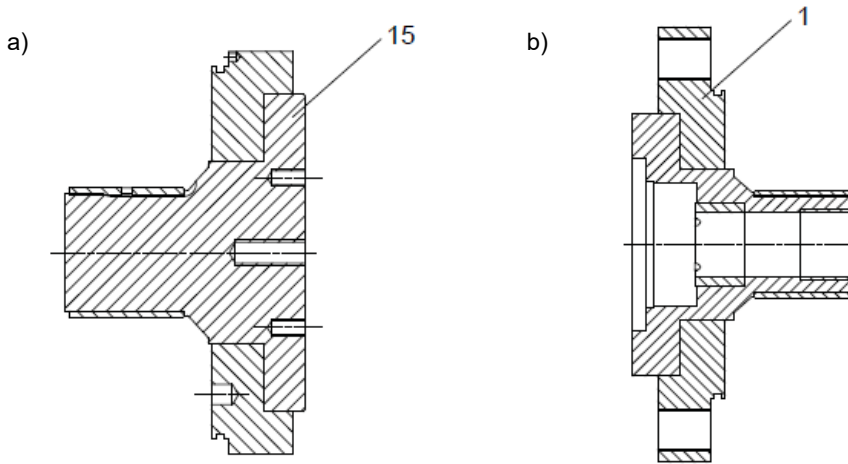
Detailed view: a) Motor end cover b) Pump flange
